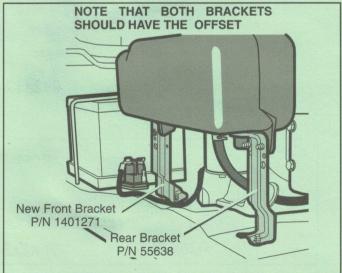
REPLACEMENT FRONT BRACKET FOR ILLUSTRATION "B"
